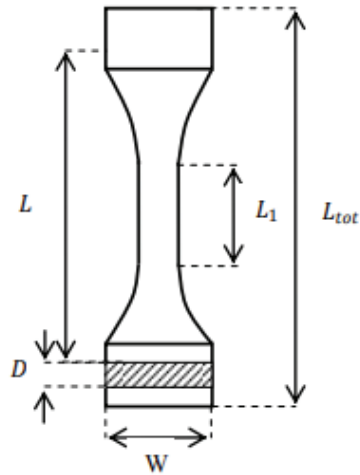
Model of pressed rectangular test specimens for tension tests.
